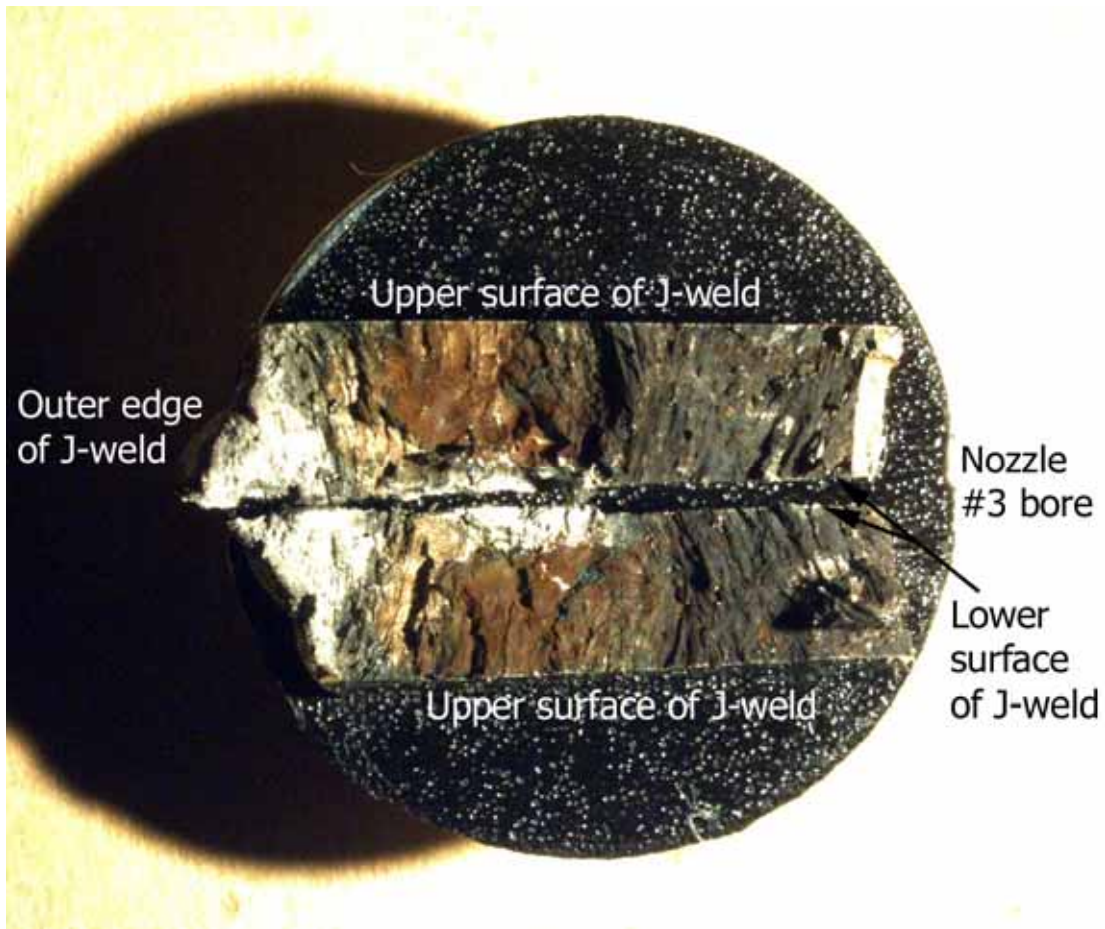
Crack tips toward the J-groove weld O.D.
